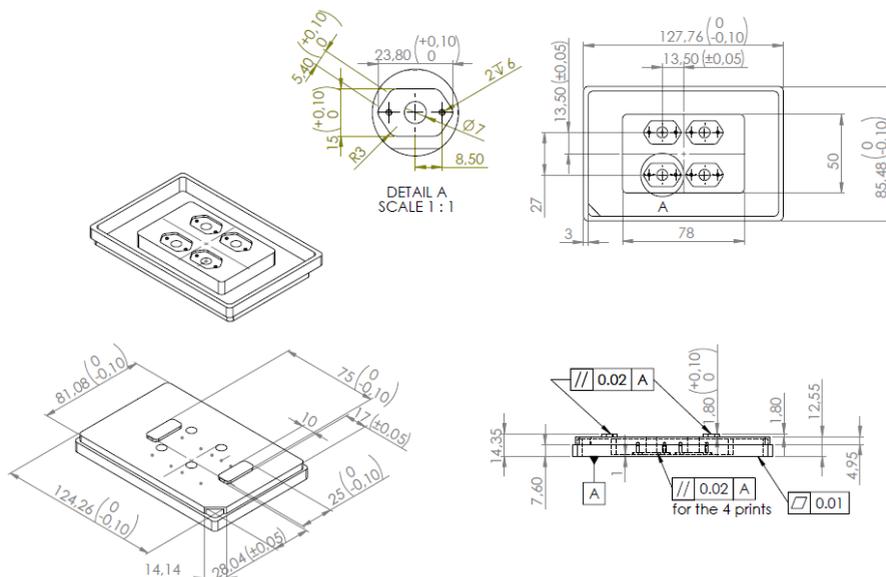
Scheme of the aluminum plate with dimensional specifications. All dimensions are in mm. General tolerances are ± 0.1 mm.
